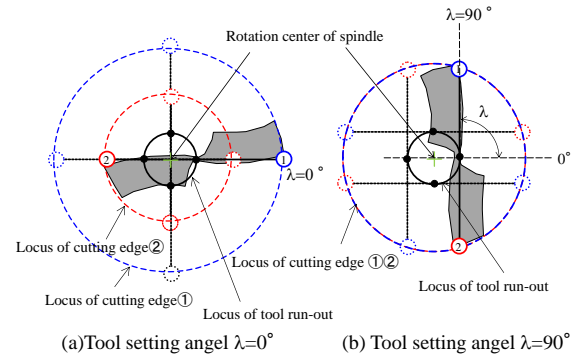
Relationship between tool run-out and locus of cutting edges for a ball endmilling
